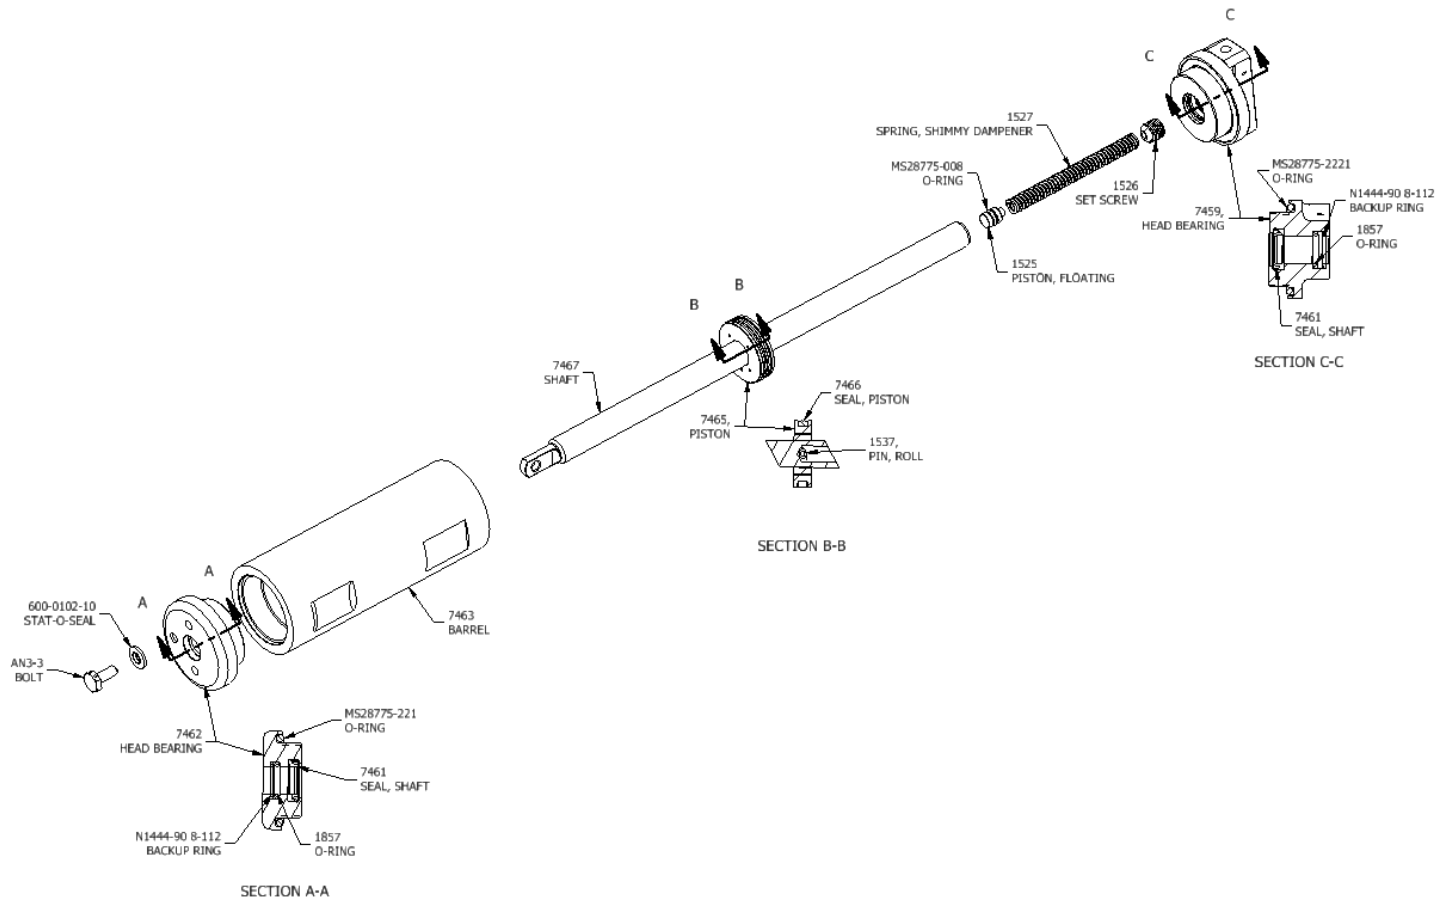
Exploded View of McFarlane Aviation, Inc. P/N MC0743624-2 Shimmy Dampener Assembly
